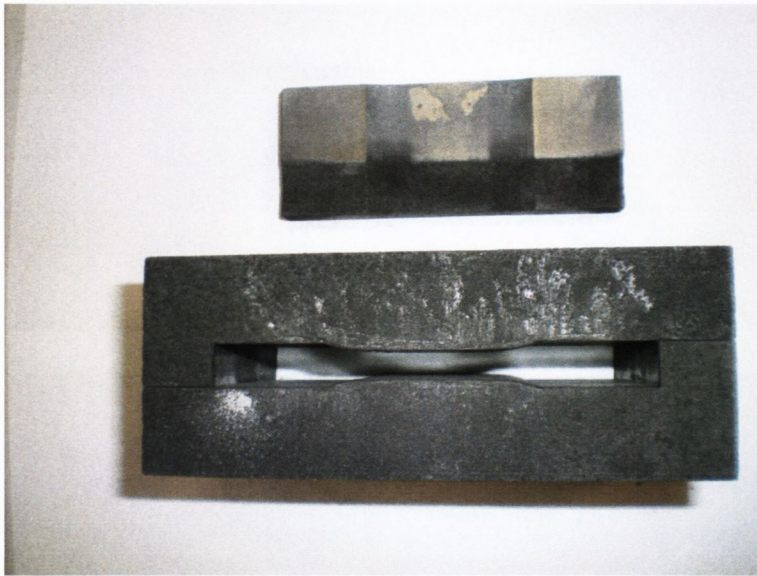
Hot pressing split-type mould for manufacture of tensile specimens.
